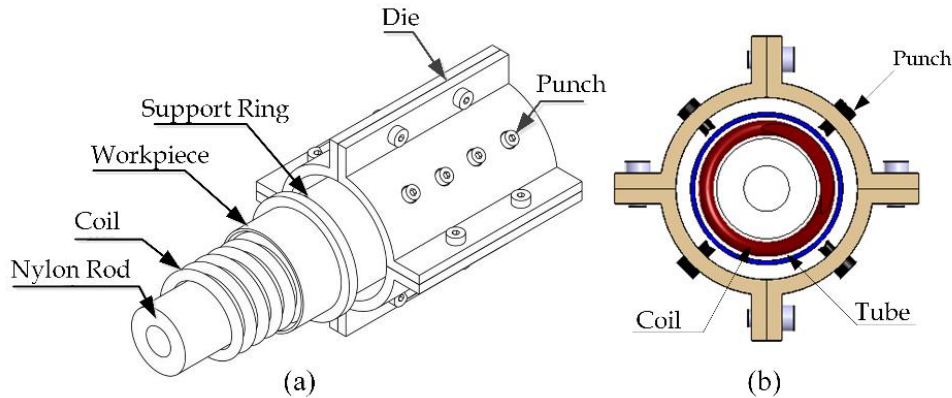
(a) Exploded assembly view, (b) Cross section of the setup
